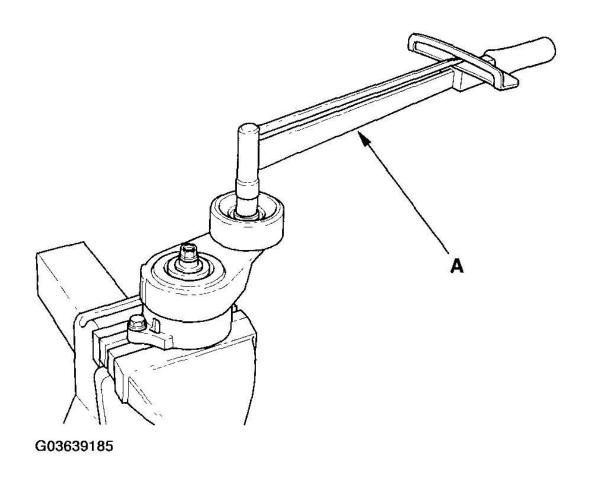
Attaching Torque Wrench To Pulley Bolt Courtesy of AMERICAN HONDA MOTOR CO., INC.
